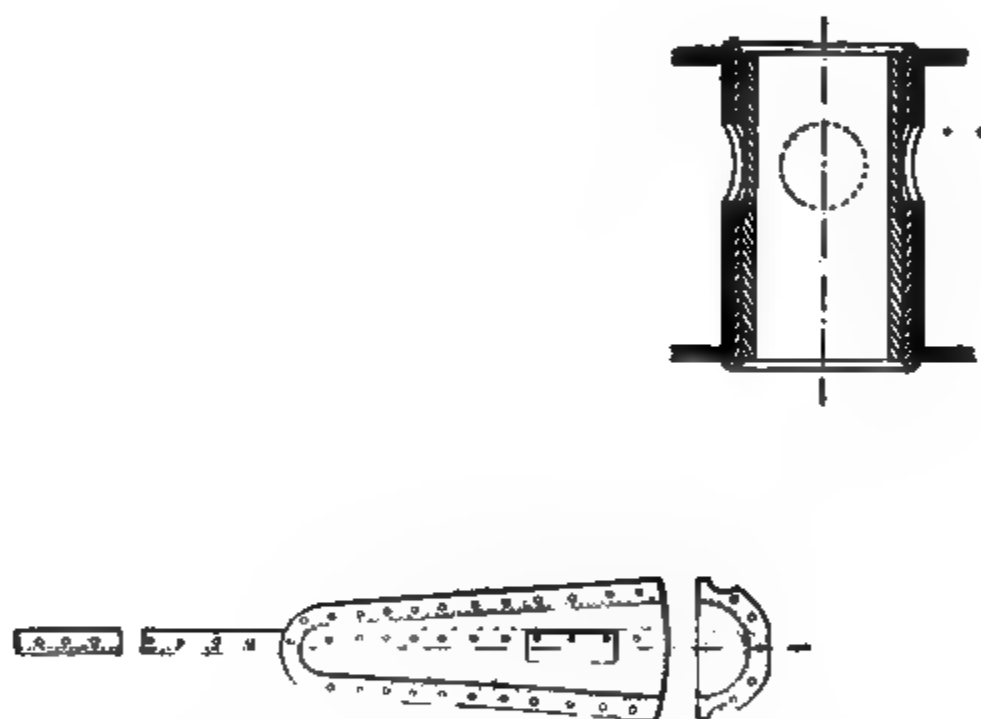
Whitney Bunsen Tube Burner of the McKay Carriage, showing section of one of the Bunsen tubes, and starting torch.
